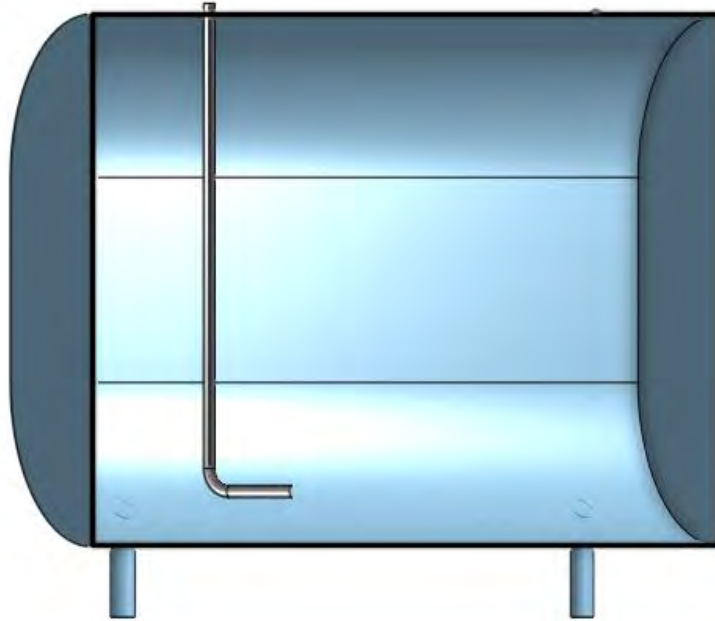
Cross-sectional drawing of tank to show in-tank rod heater with horizontal heating element
